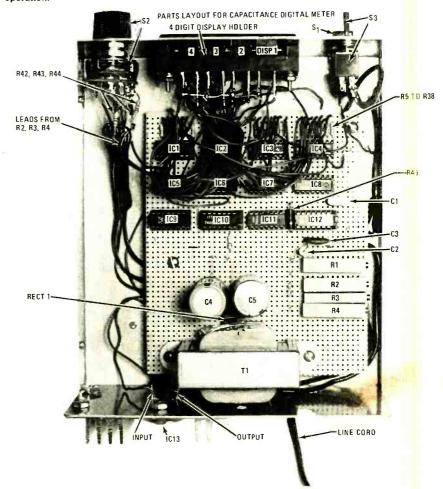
PERFORATED BOARD and wire-wrapping was used to build the prototype.
